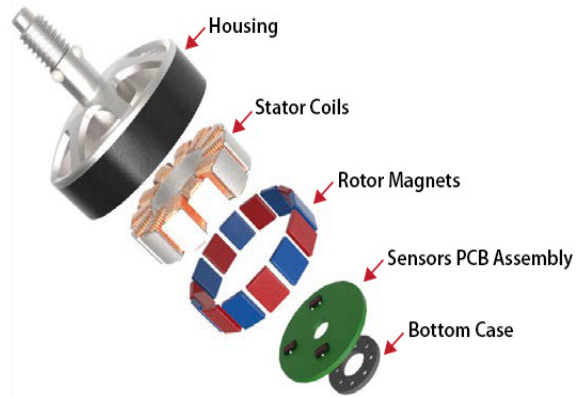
Typical BLDC motor structure. Rotor magnets may be outside or inside stator coils, depending on design.
